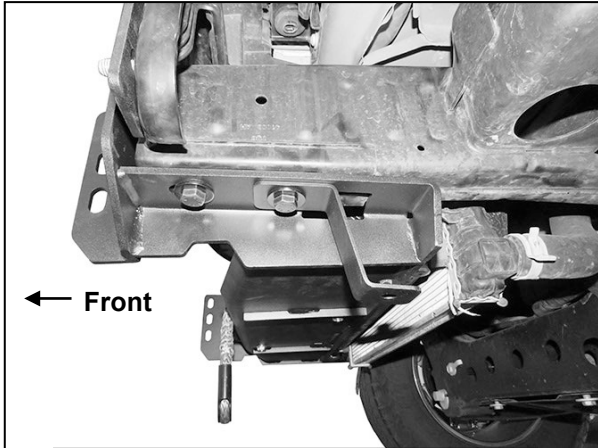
Attach Winch Tray Bracket Assembly to bottom inner mounting hole in mount on end of frame. Also see Fig 26
